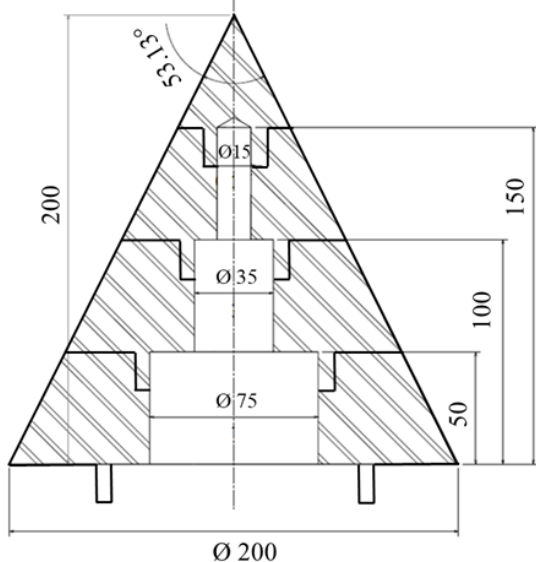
Technical drawing of the reference object. Length units are given in mm.
